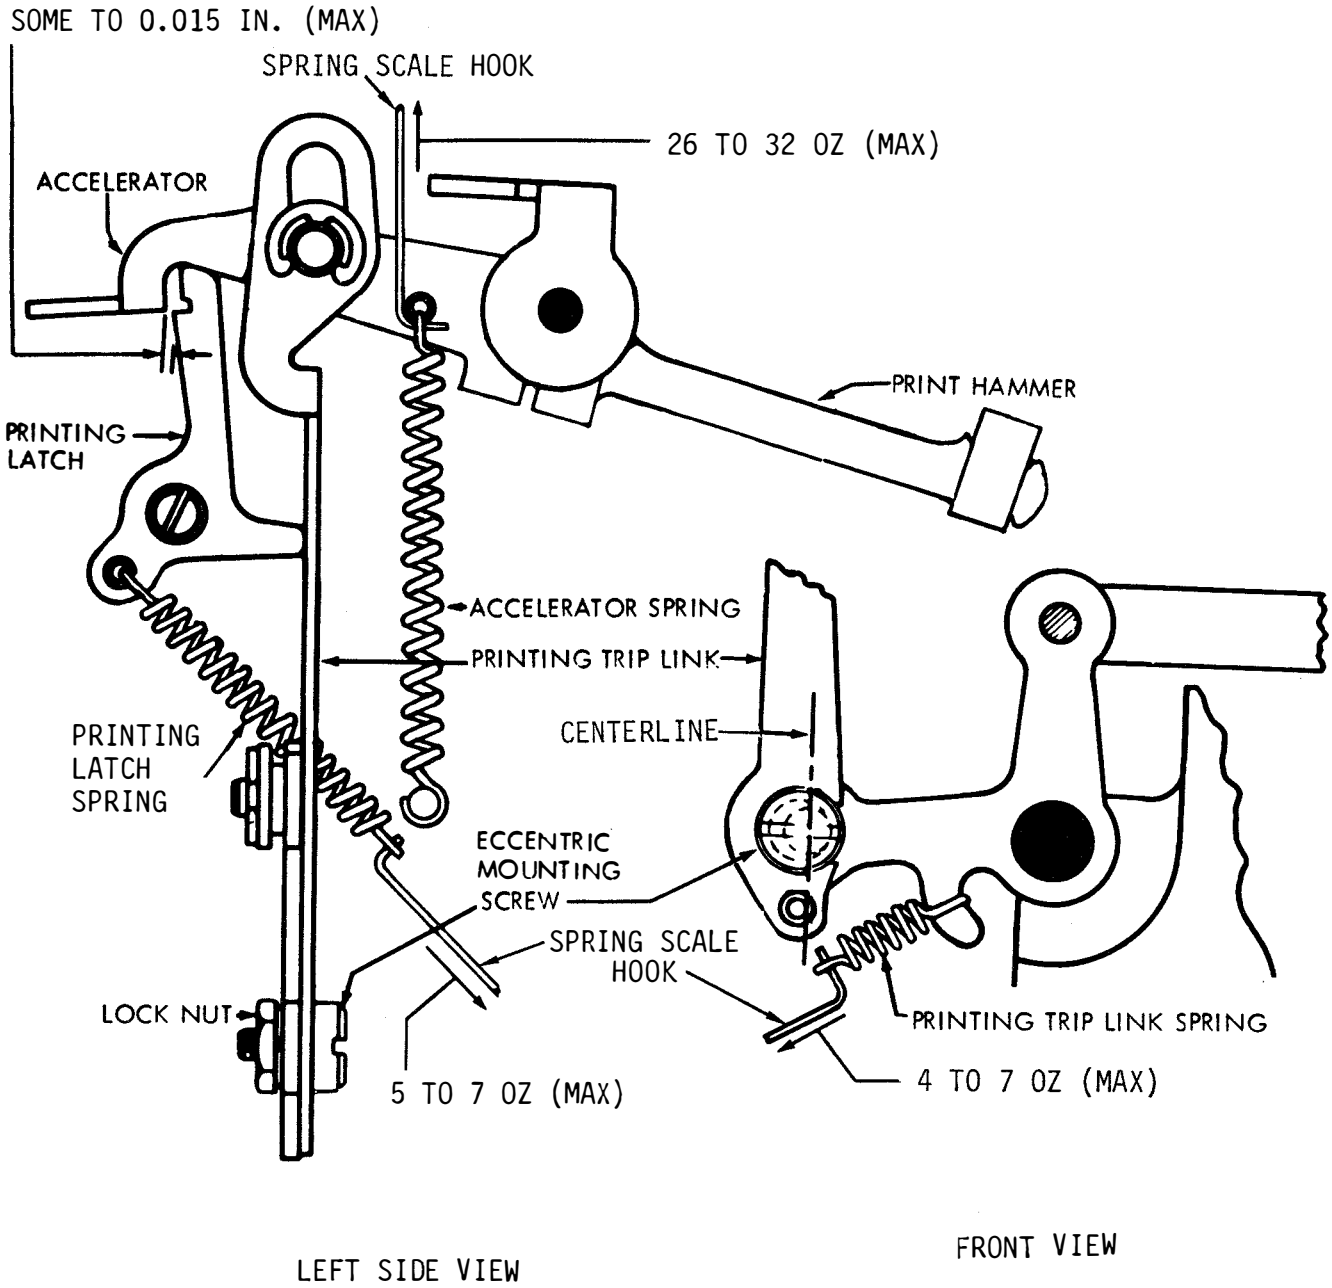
Printing Trip Link, Trip Link Spring, Latch Spring, and Accelerator Spring
